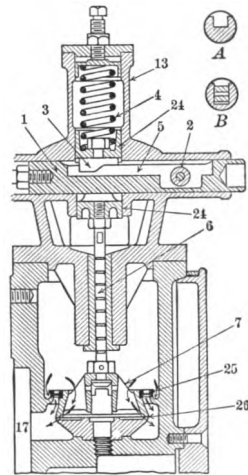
ADMISSION VALVE AND GEAR, AMES - STUMPF "UNA-FLOW" ENGINE
